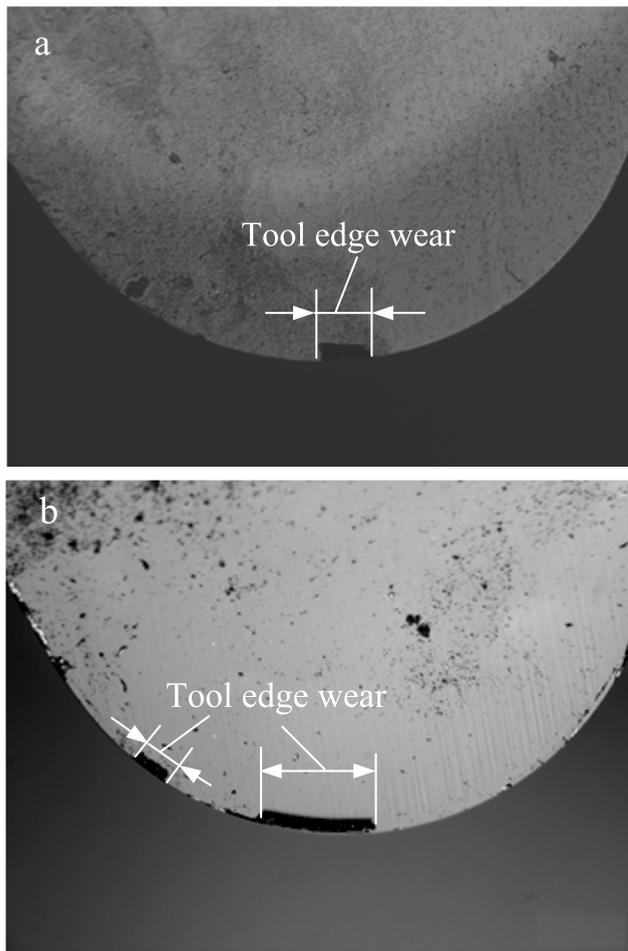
Photographs of a tool rake face (a) UAUT (b) CUT (cutting time 25 min).
